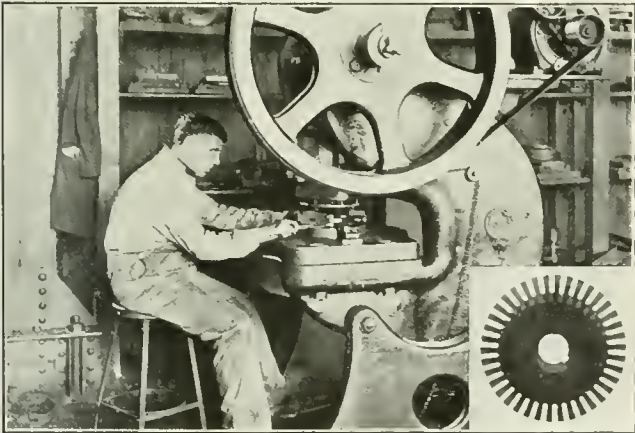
Punch Press forming Core Lamination with Enlarged View of Lamination in Lower Corner
